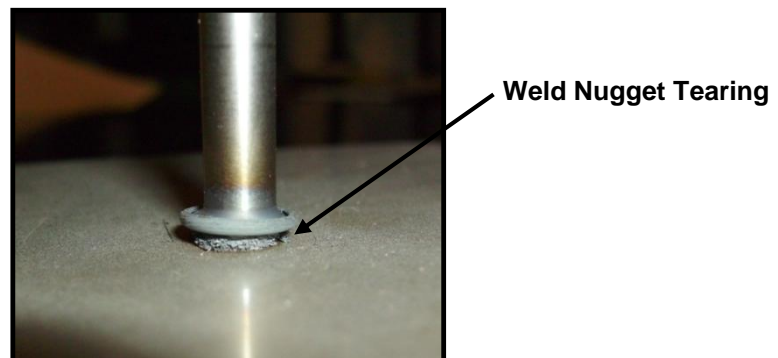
Weld Nugget Tearing in Friction Stud Welding of Stainless Steel [23]
